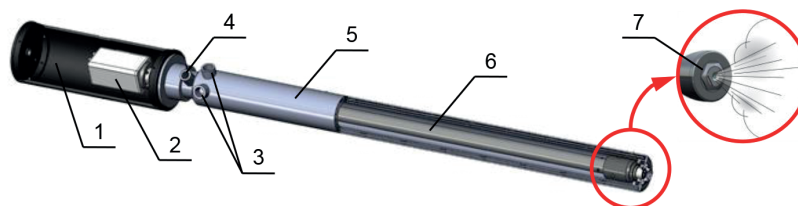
An illustrative diagram of vision head structure [13]: 1 – protective casing of the camera, 2 – camera, 3 – water supply points, 4 – compressed air supply point, 5 – cooler with a water jacket, 6 – optical tube, 7 – air flow around head lens
